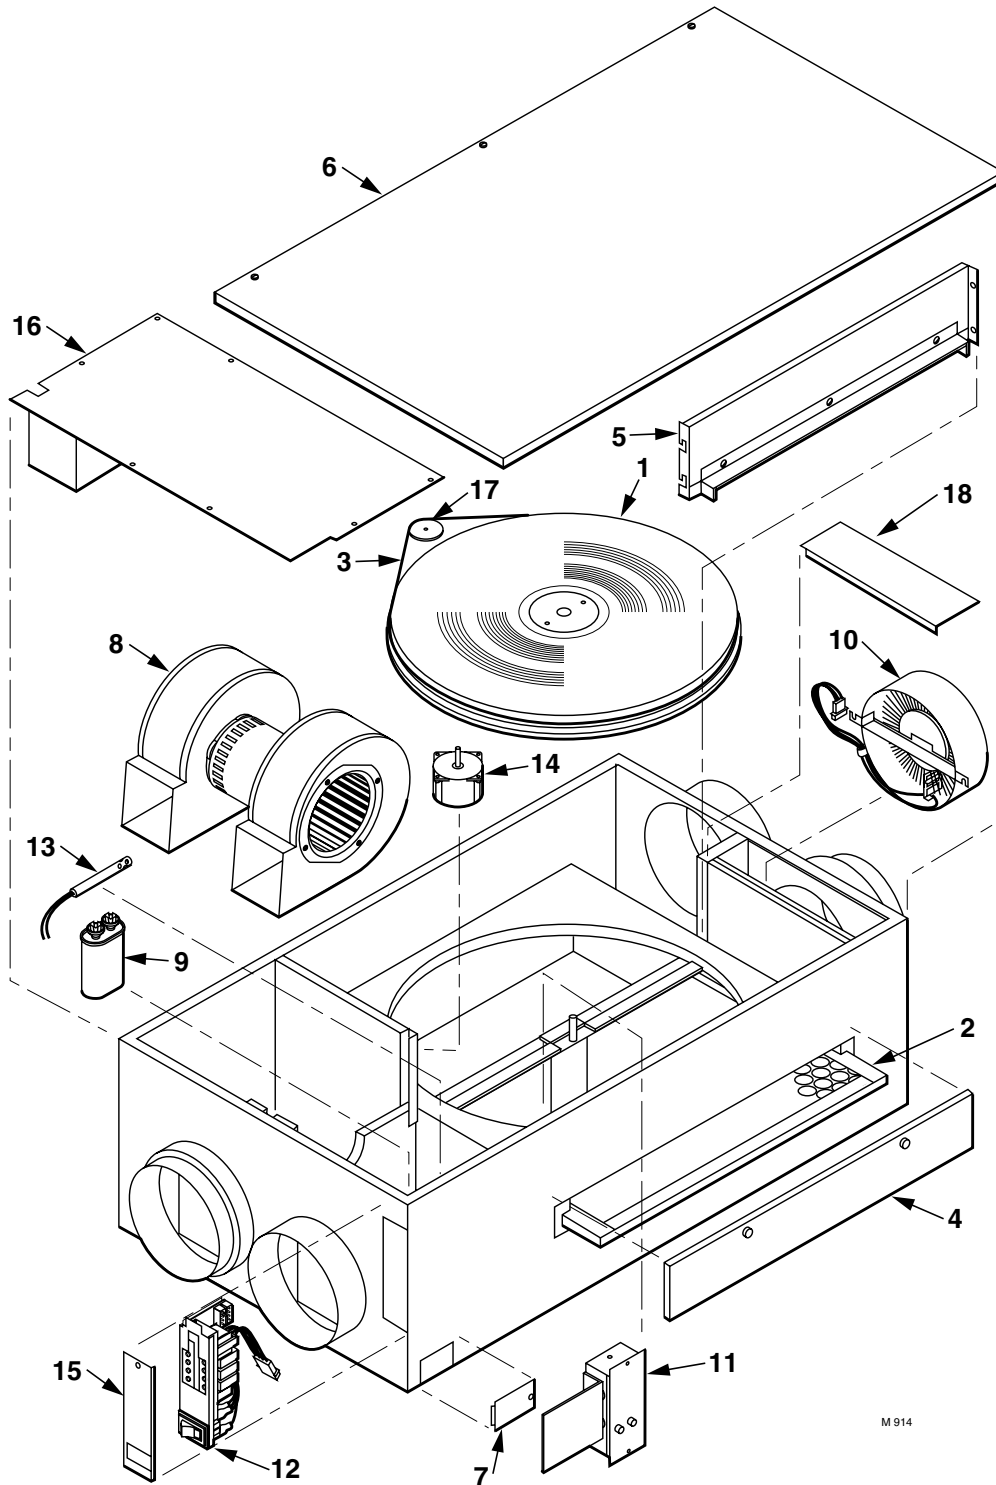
ER200 exploded view. Part numbers are keyed to parts list.
